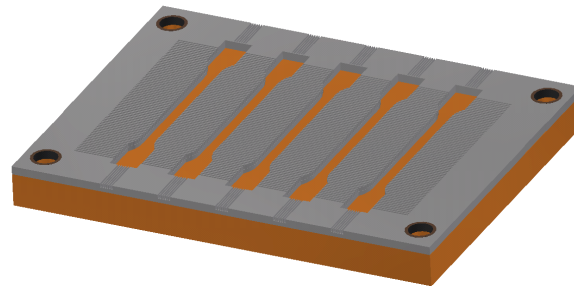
Cavity plate with the dimensions of ASTM D636 (I), on the lower mold support
